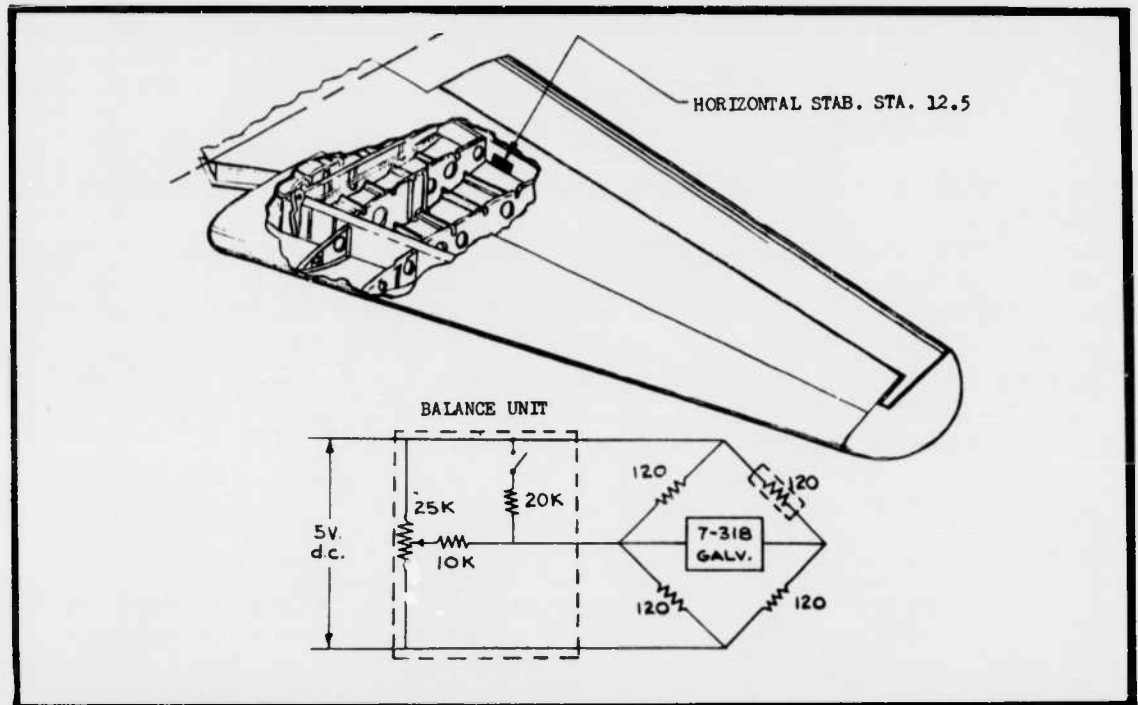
Typical Strain Gage Bridge Installation for Horizontal Stabilizer Structural Strains (Single-Active-Arm)
